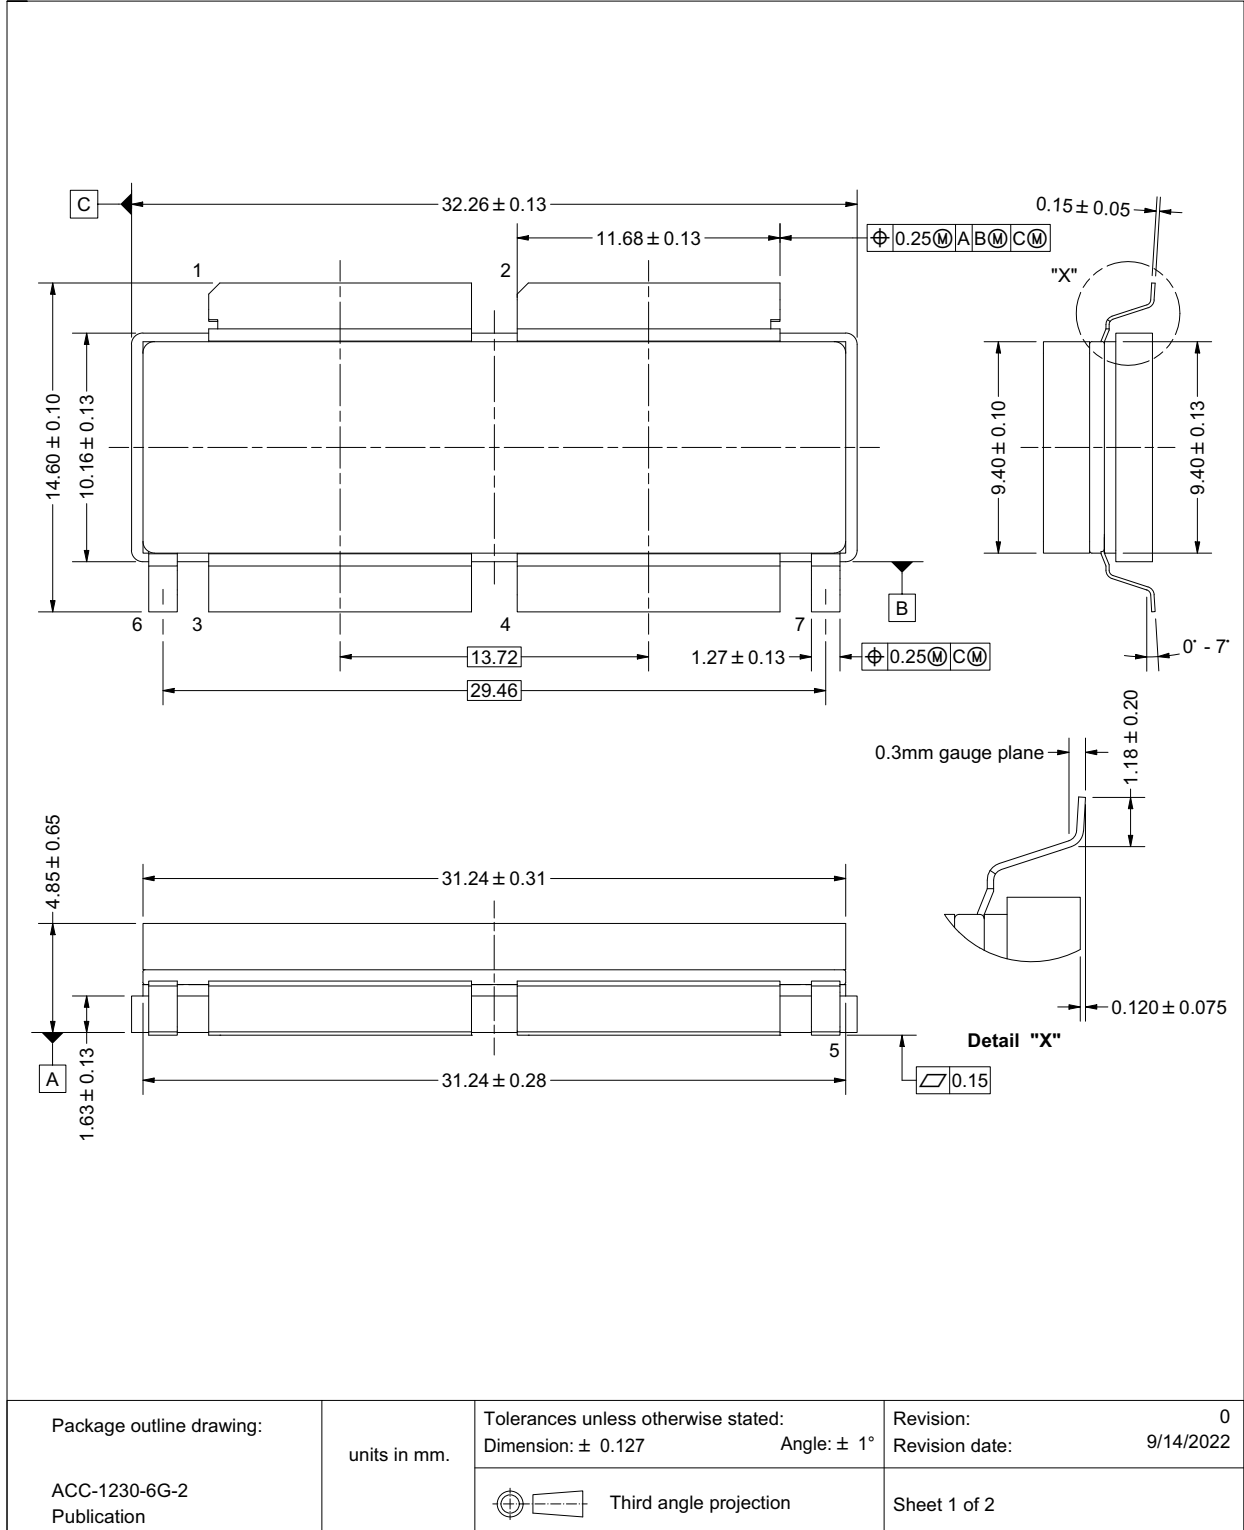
Package outline ACC-1230-6G-2 (sheet 1 of 2)
